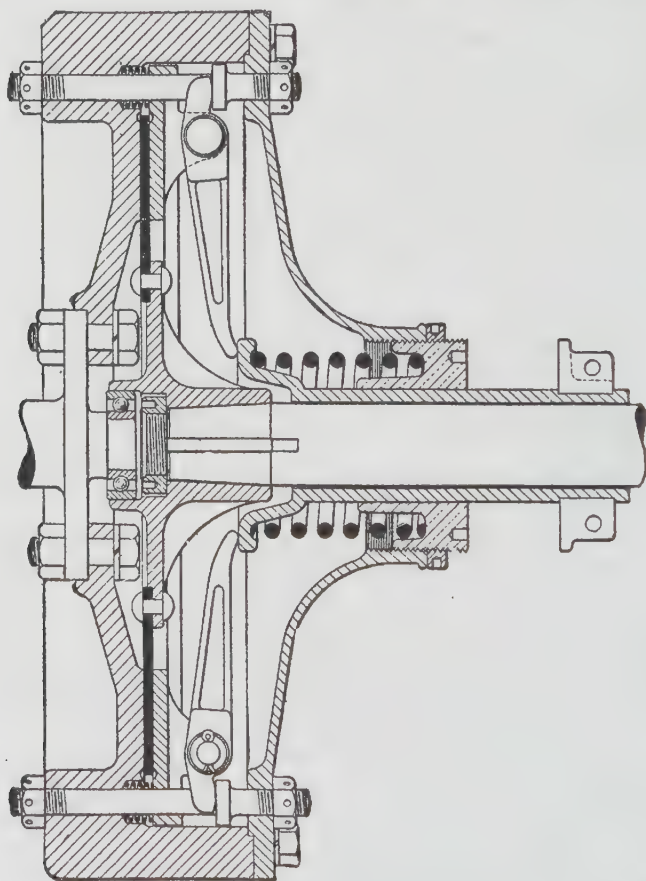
PLATE CLUTCH, LEVER TYPE.
